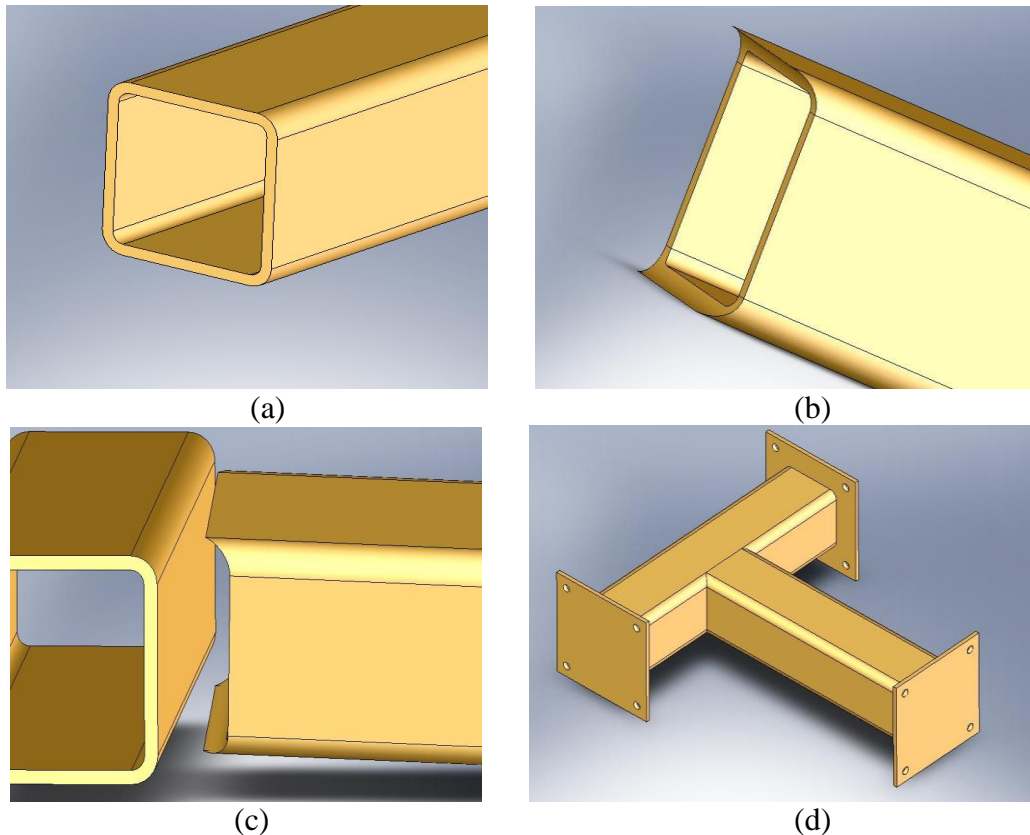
Test specimen: (a ) Schematics of traditional mechanical cut edge (b-c) Schematics of laser cut edge and (d) T-joint connection fabricated using laser cutting.
